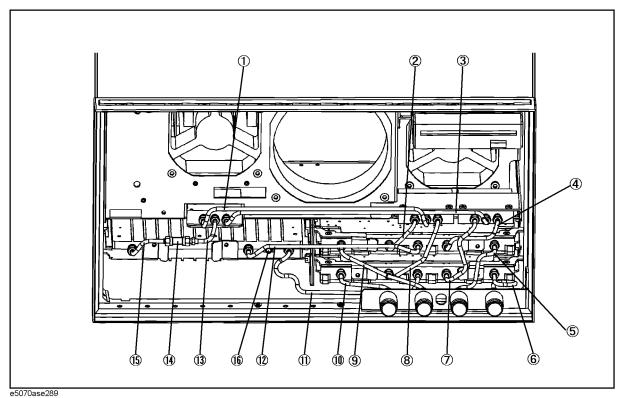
Front View (Semirigid Cables) (Opt. 413)
